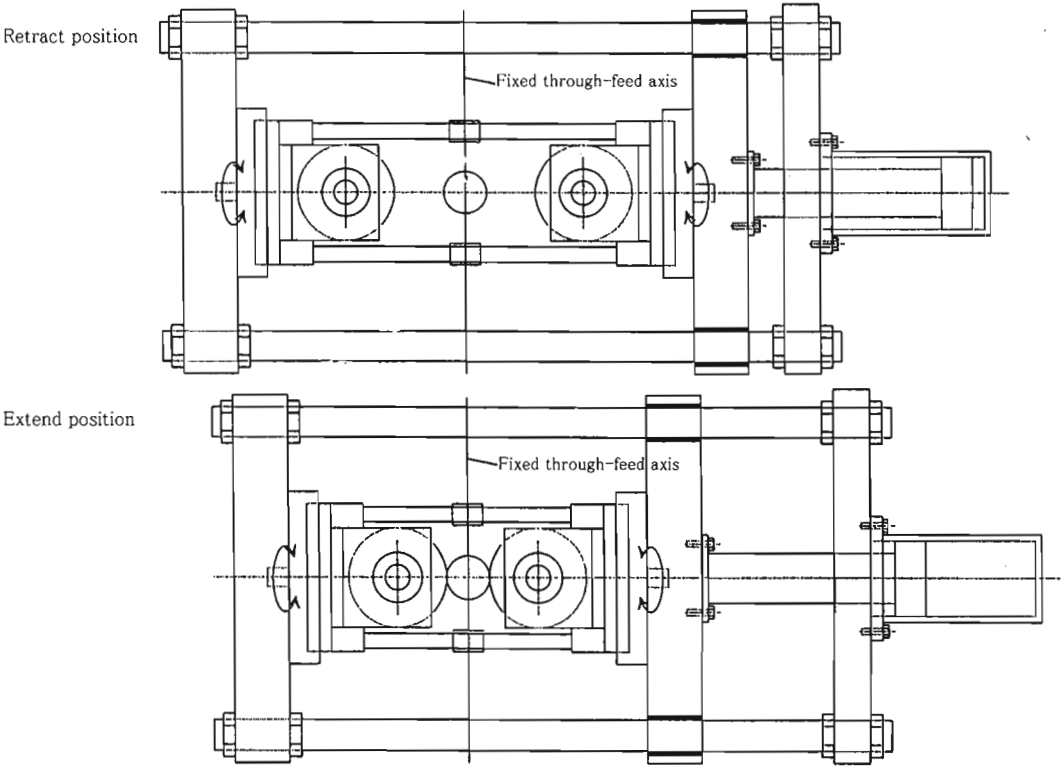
Infeed motion - Two end position of infeed actuator (Top view)
